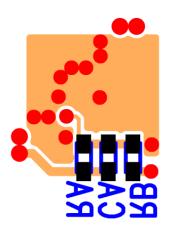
Top PCB Layer Critical Components and Copper for Minimum Footprint
